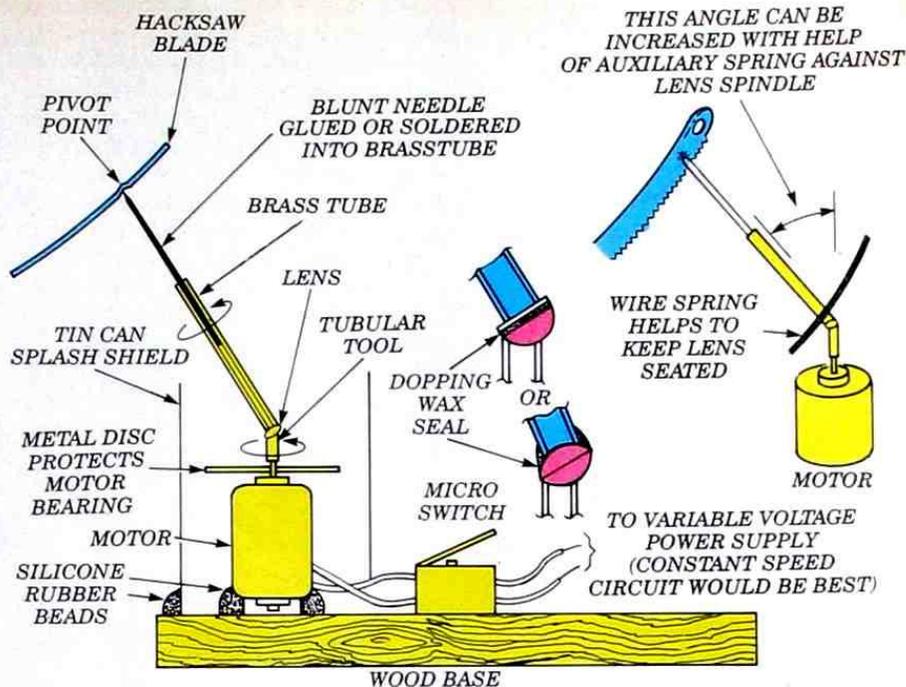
How to assemble and use a simple apparatus for grinding glass lenses. (See text for details.)
